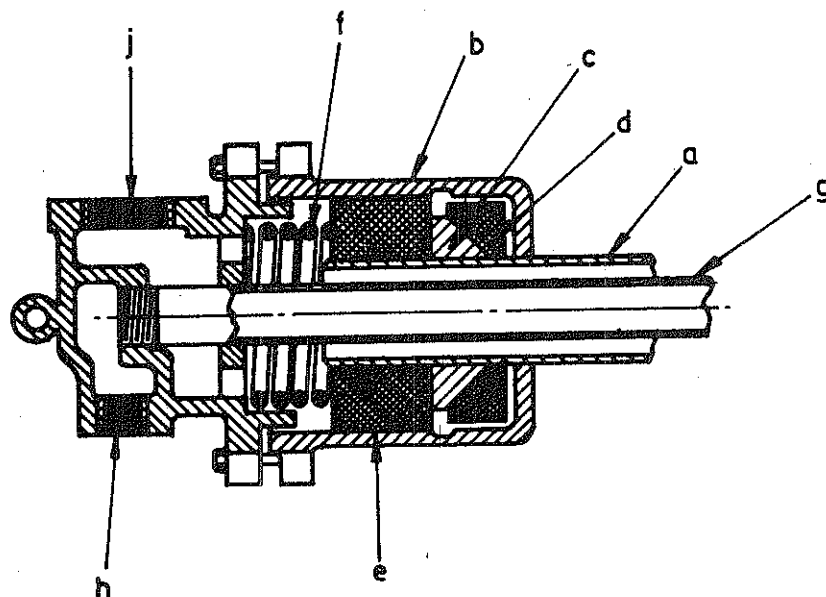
Rotary joint (a) rotating steam pipe (b) joint housing (c) shoulder (d) graphite seat (e) graphite bushing (f) seating spring (g) condensate discharge pipe (h) condensate discharge connection (j) steam connection
